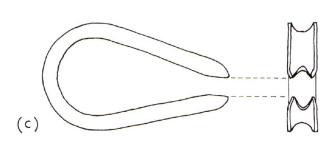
Bracing equipment a Eye-bolt b Screw-eye c Thimble
